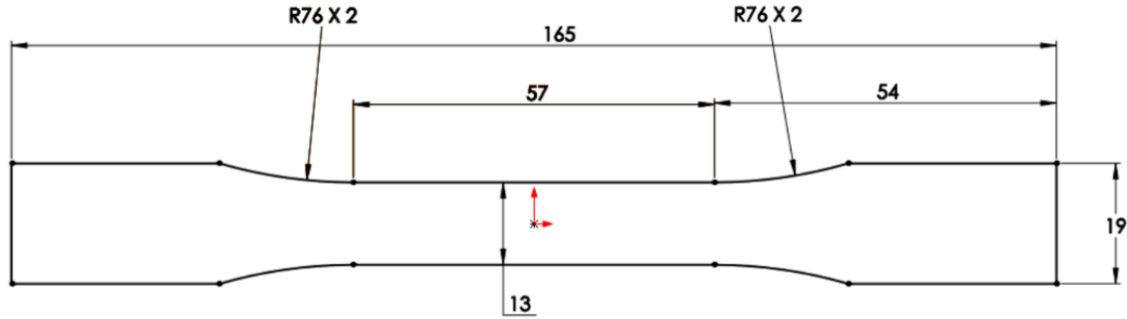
Specimen dimensions per ASTM D638-14 type I, mm.
